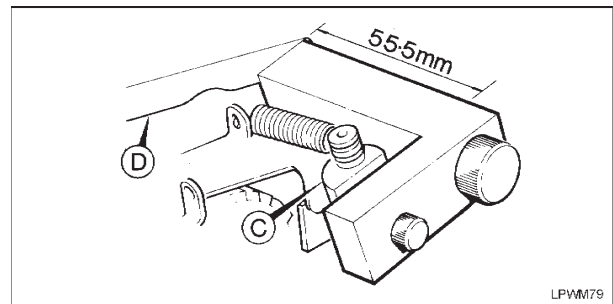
Setting the Rack - 317-50114 - Lister Service Tool
